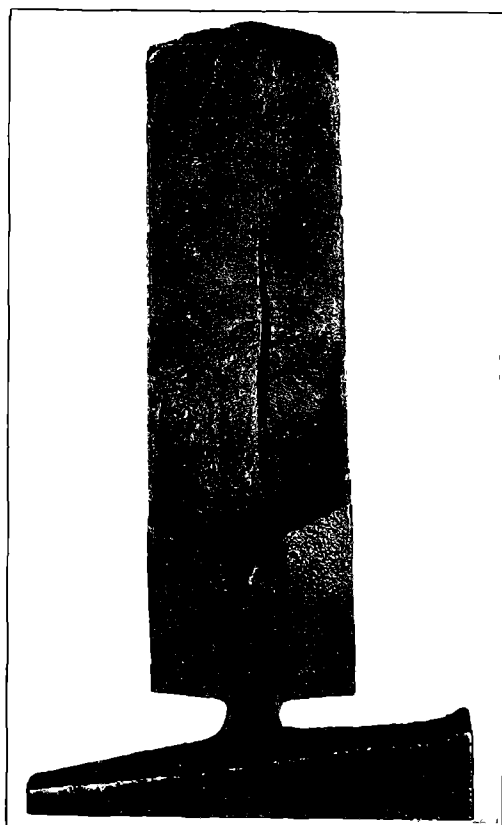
Showing fracture in head of rail, progressive fracture starting at split in head View from the under side
